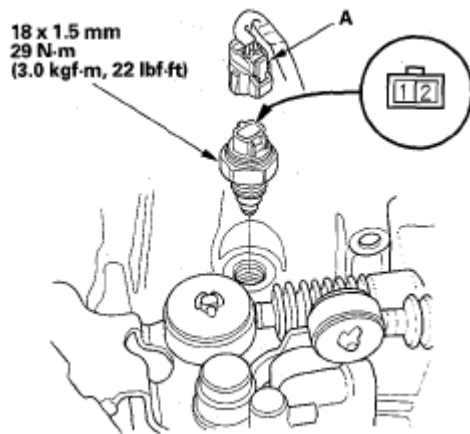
Identifying Back-Up Light Switch Connector With Torque Specification
